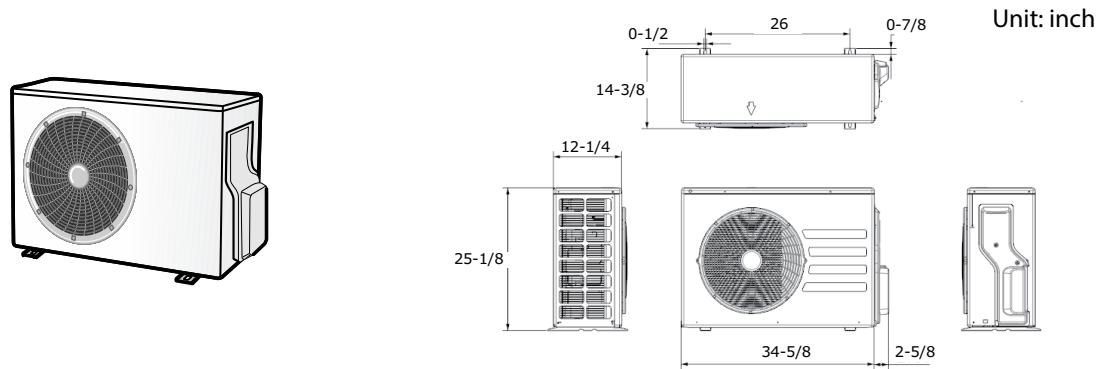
Dimensional drawing for 24 and 30 MBH capacity units
